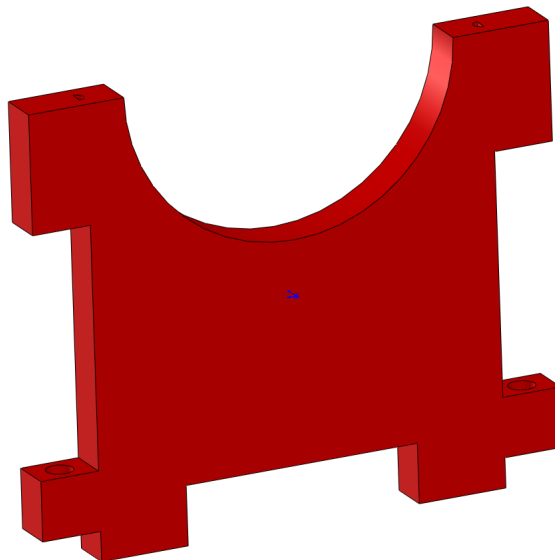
Vacuum seal support for flanges of with a diameter of 113.5 mm.
